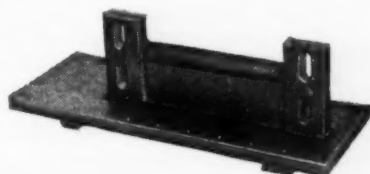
Present Design in Welded Steel—Is simpler to fabricate than the original construction. Components are pre-machined prior to welded assembly to simplify manufacture.
